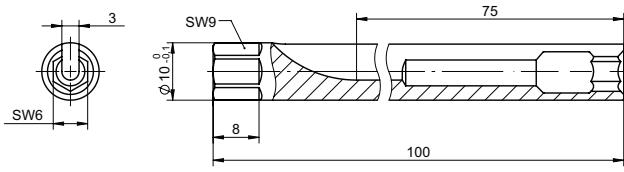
Mounting tool Type 1300A165, SW9 ... SW6
